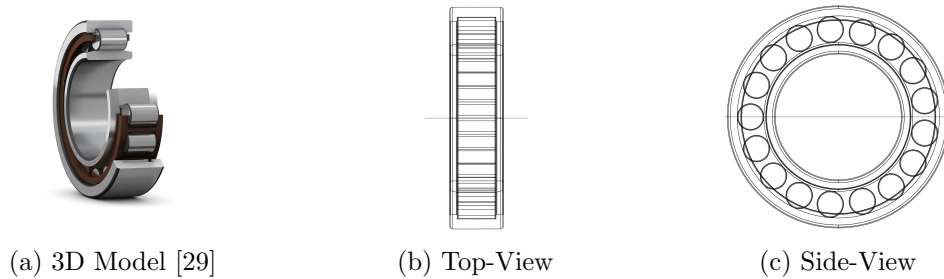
Cylindrical roller bearing, SKF NU 2217 ECP [6]
